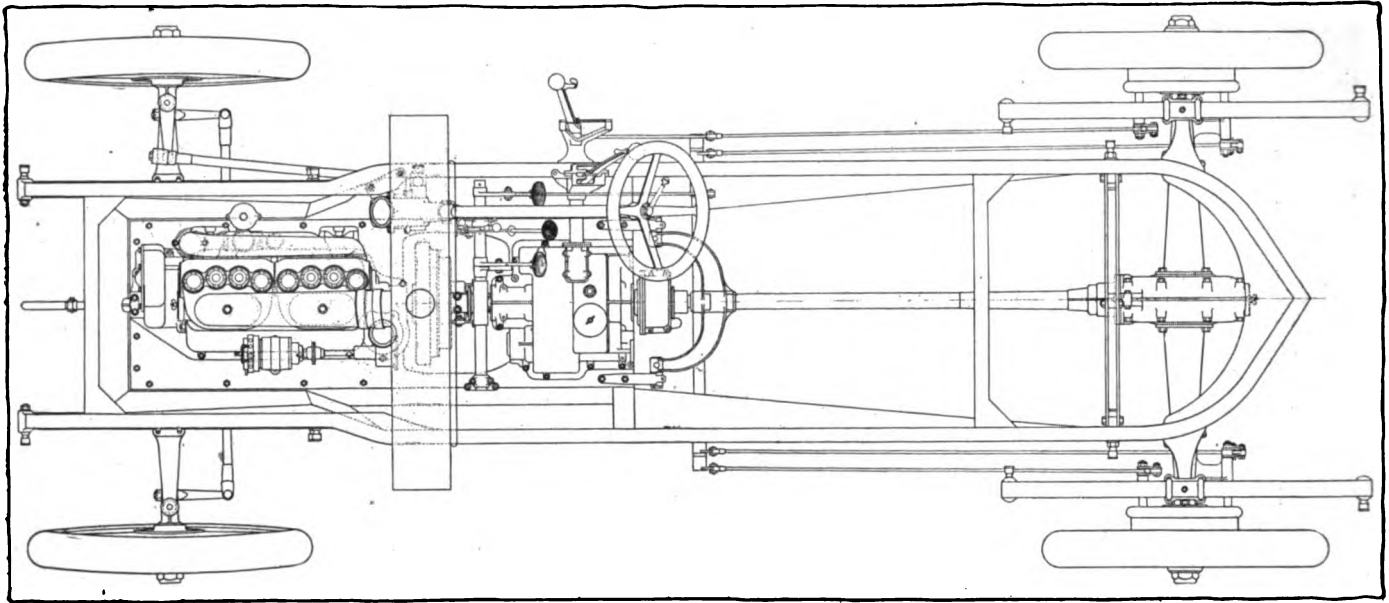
Plan view of the four-cylinder 15.9 horsepower Arrol-Johnston chassis, showing the unique rear junction of frame side members
